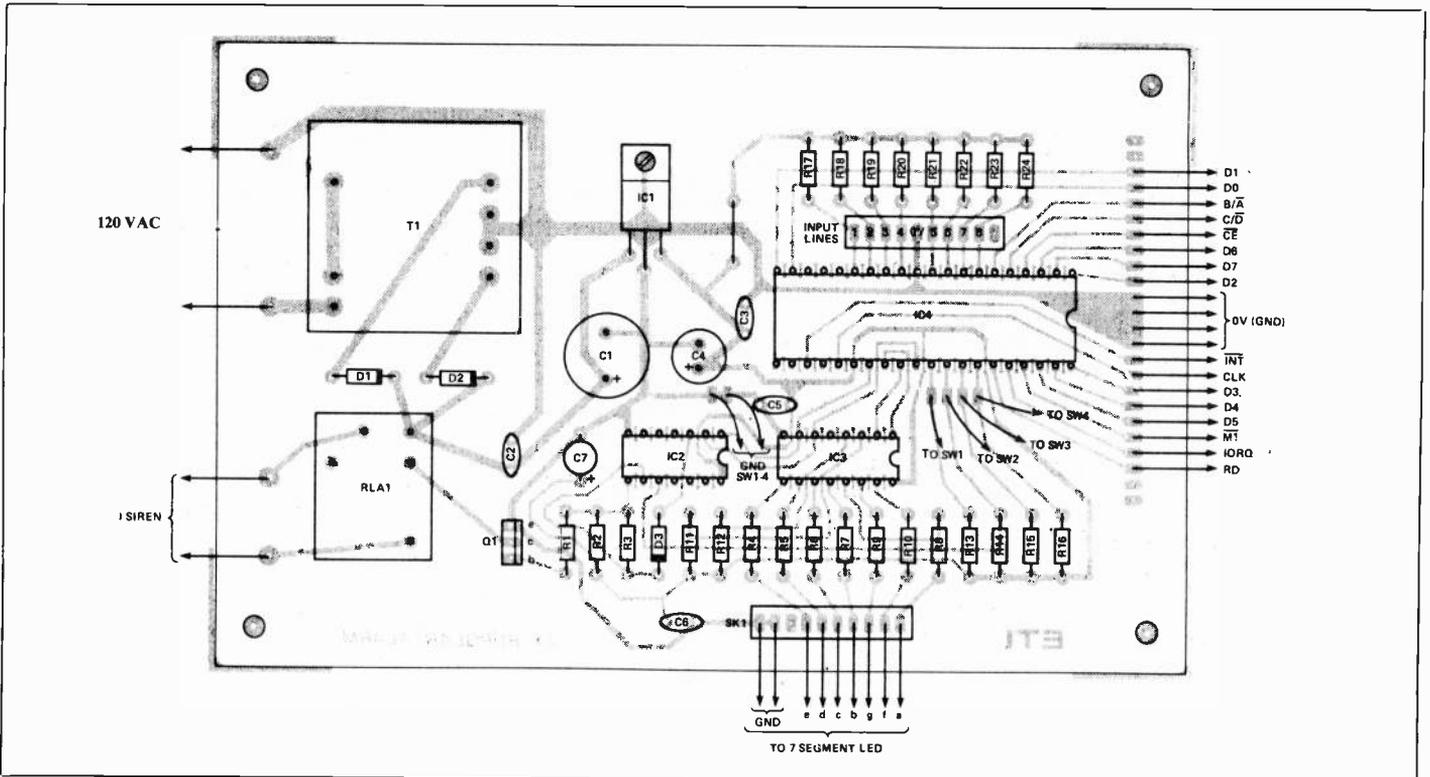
The overlay diagram for the PCB. Note: the circuit was originally designed for a PC-mounting transformer which may not be available. An ordinary transformer can be mounted off the board with the leads soldered to the PC pads.
